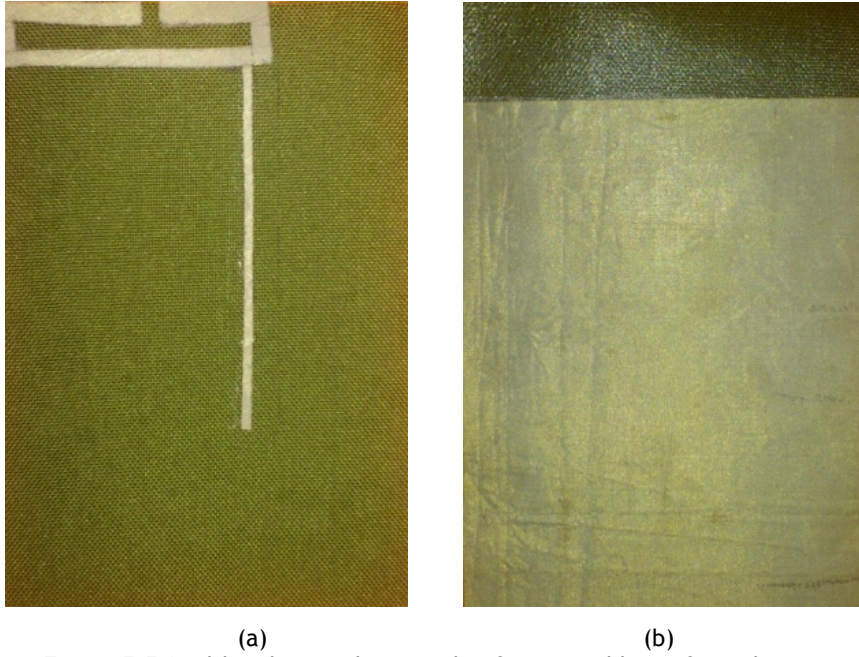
Dual-band printed monopole after assembly (a) front (b) rear
